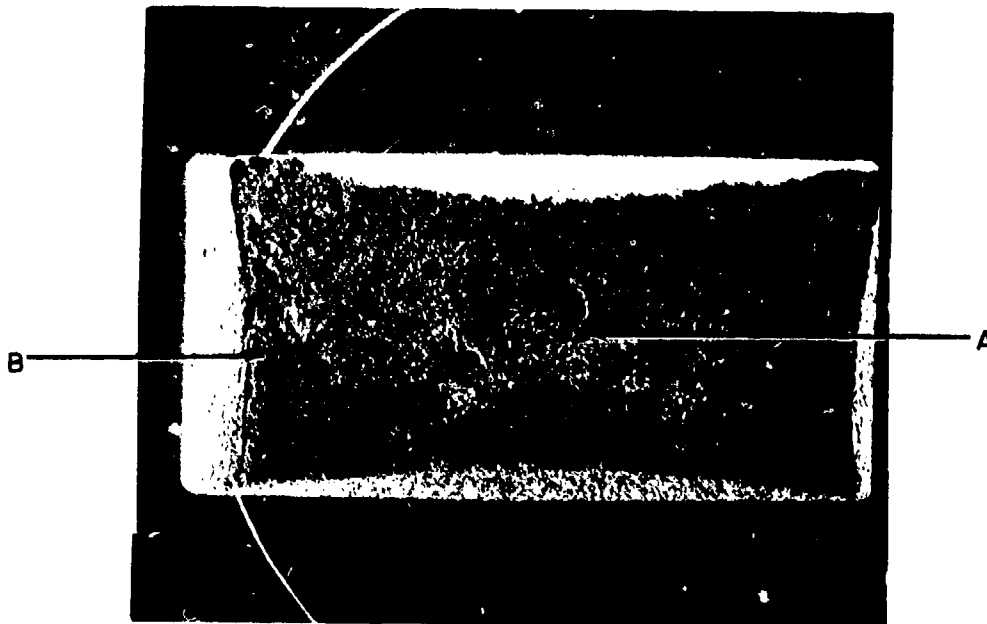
Tensile fracture surface of A-36 steel, 12x.
